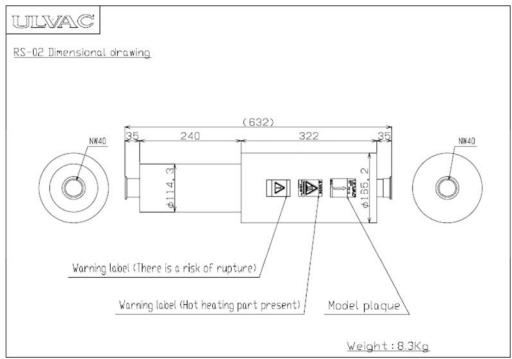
RS-02 Dimensional drawing (LR180, LR1800)
